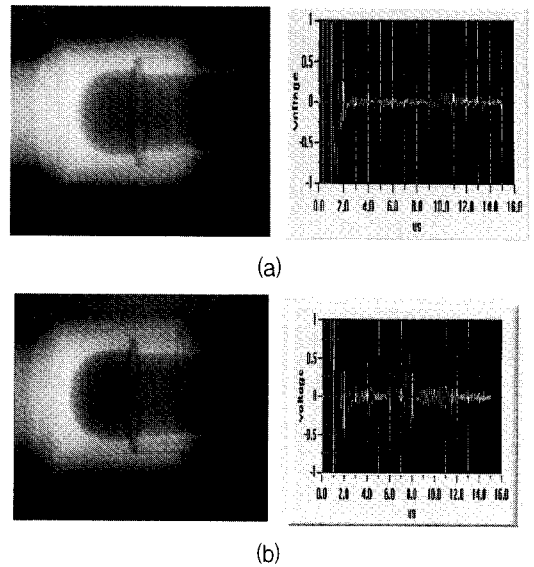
Radiographs showing the socket welded small bore pipe and ultrasonic signal obtained from welding specimens; (a) without defect and (b) with defect
